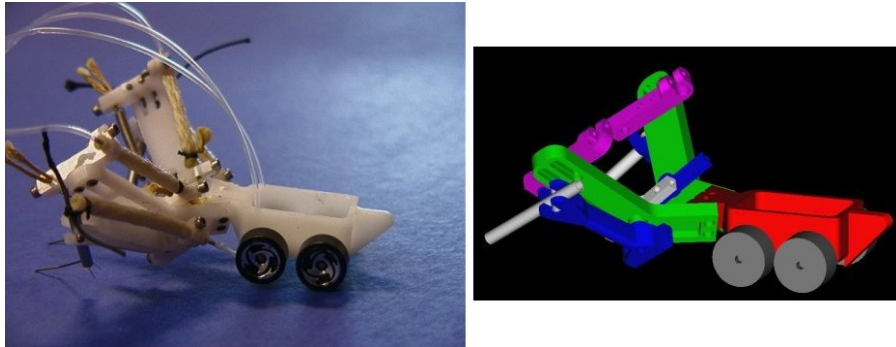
Left: Cricket Cart. Right: CAD Drawing of Cart
